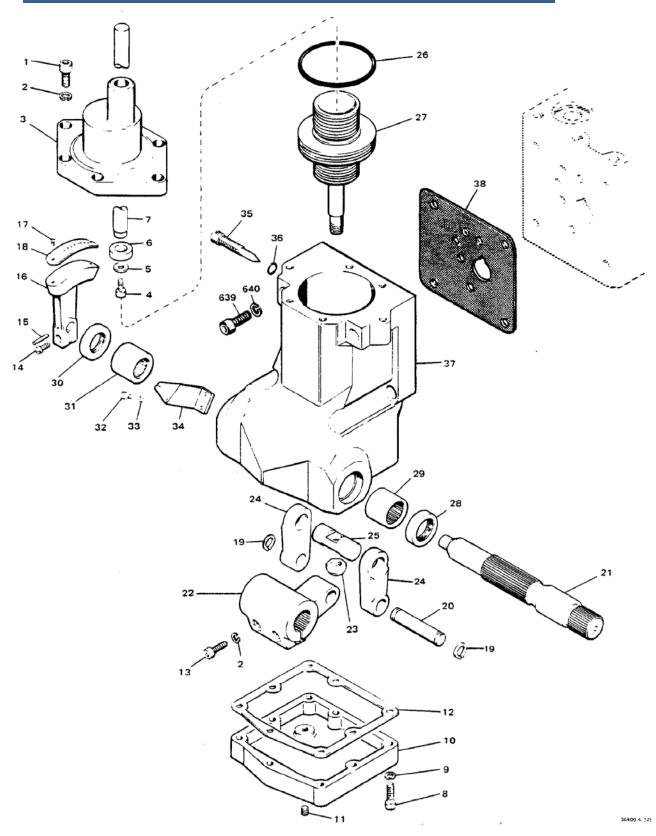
Exploded View of 29 ft-lb Differential Power Cylinder (rotary output with tailrod)
